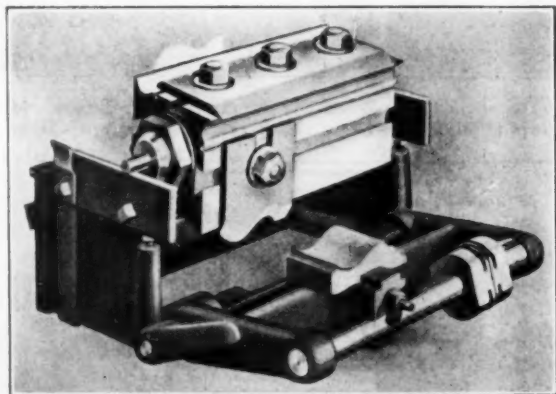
MOLDING KNIVES SET ON SQUARE HEAD TO MAKE PATTERN SHOWN
